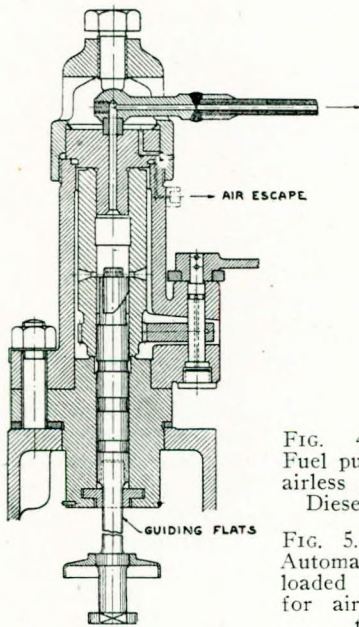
(Left) Fuel pump for an airless - injection Diesel engine.
